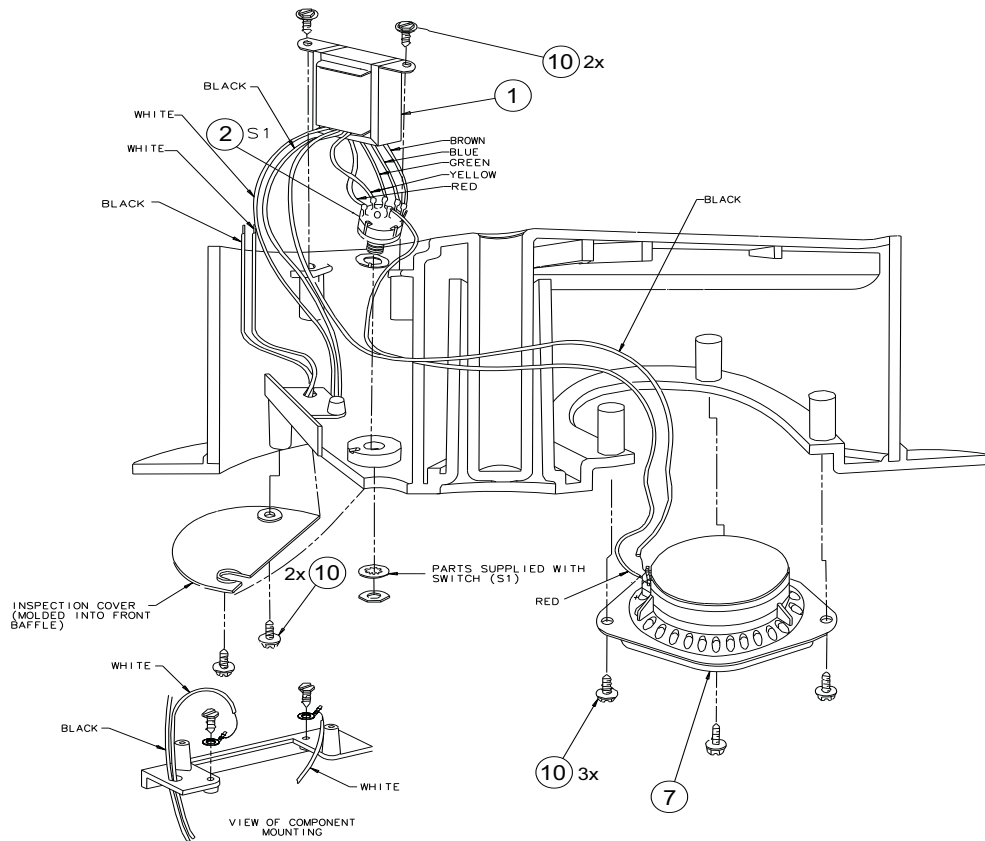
102 Flush-Mount RoHS Loudspeaker Exploded View
